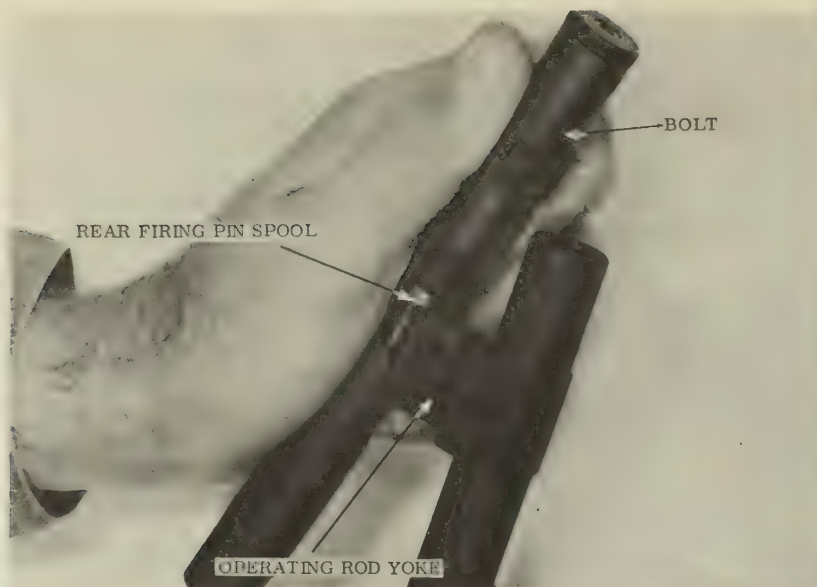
Assembling the Bolt and Operating Rod--Step One.
